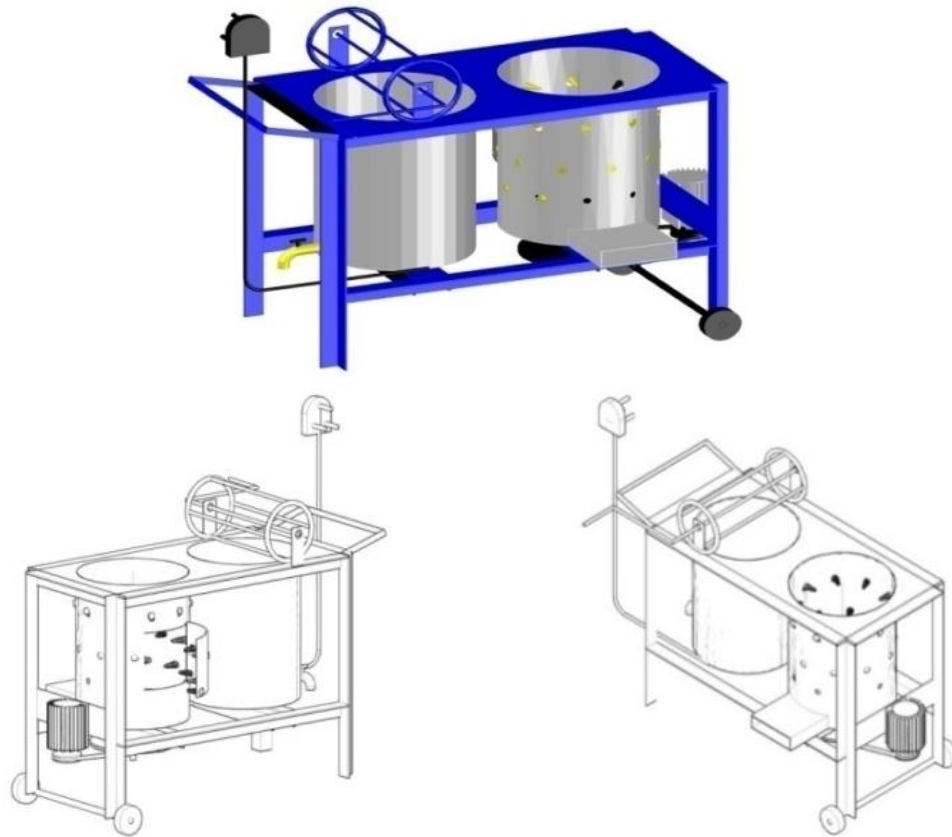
Isometric views of the conceptual design of de-feathering machine with scalding tank
